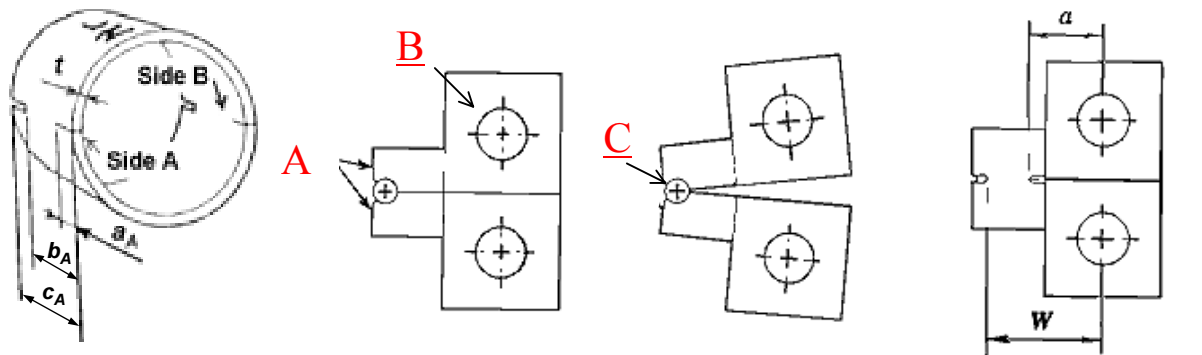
Schematic diagram of the PLT specimen, fixture, and specimen-fixture assembly.
